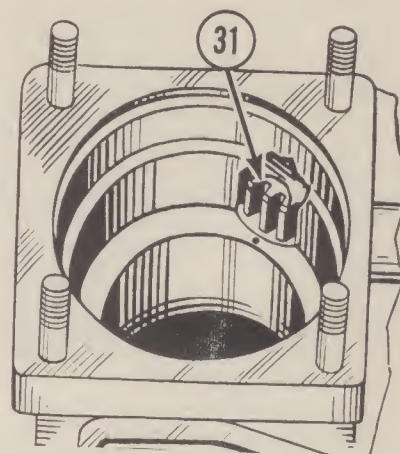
When assembling injection pump, the center open tooth of gear at top of quill shaft (31) should be registered with mark on body as shown, when pump camshaft is positioned as shown in Fig. 0483.
